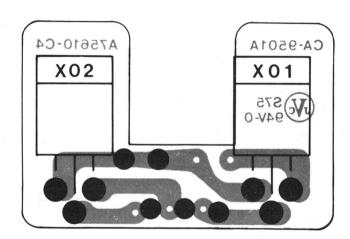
Power and Focus Regulator PCB (CA 9501A) Components Layout
